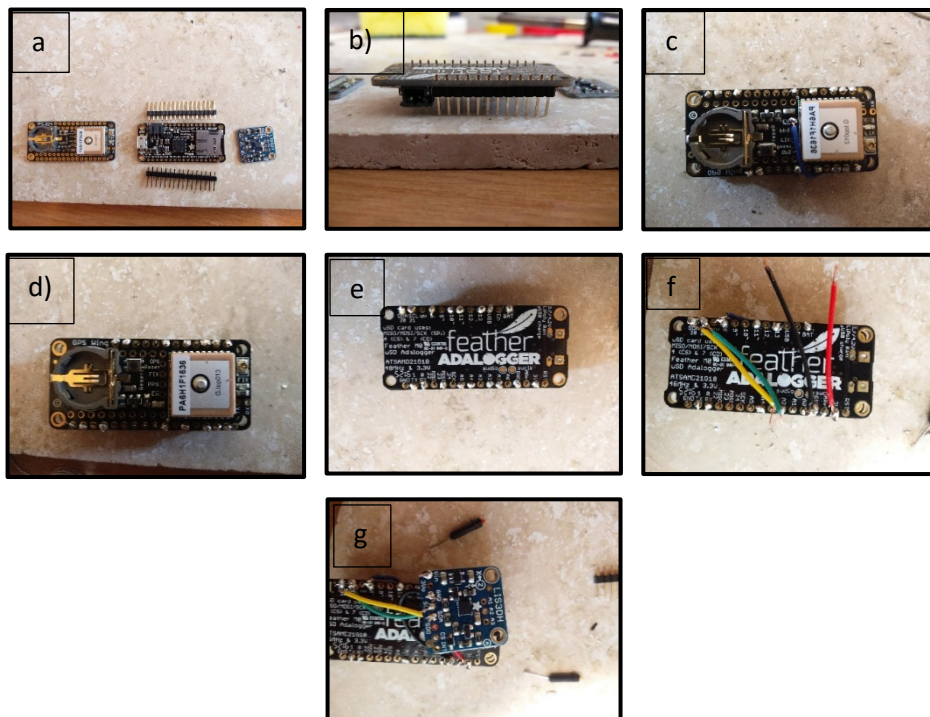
a) Starting components from left: GPS board, MicroController board with header pins, accelerometer. b) First step was to place the header with the smaller pins through the controller board. c) Solder the pins into the board making sure that at least the gnd, 3V TX and RX were securely connected. d) Solder the GPS board onto the longer pins above the controller board. e) Solder a wire that connects a data pin in the controller board to the enable pin in the GPS board. f) Solder wires onto the 3V (red) gnd (black), SCA (green) and SDA (yellow). g) Solder the wires into their corresponding pin on the accelerometer.
